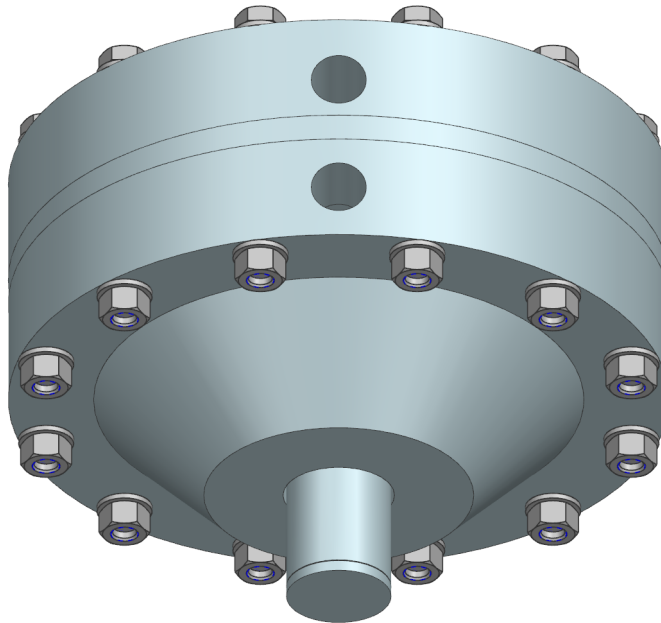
Bottom view of the completed injector design. Bolts are hex head DIN M5x50.
